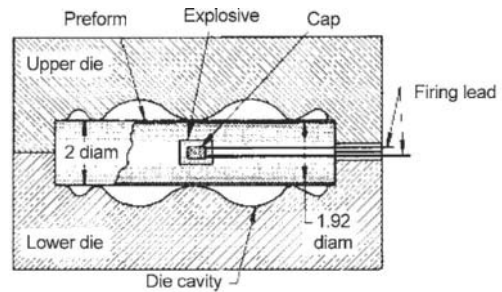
Confined system for explosive forming. Dimensions in inches
